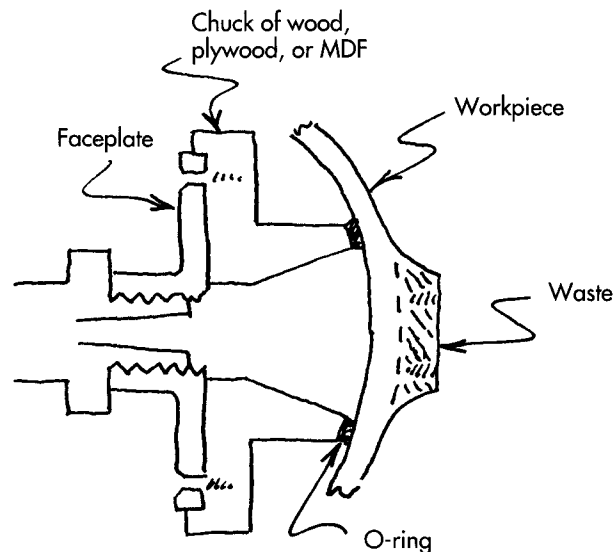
Holding a wavy-rimmed workpiece on a spigot
